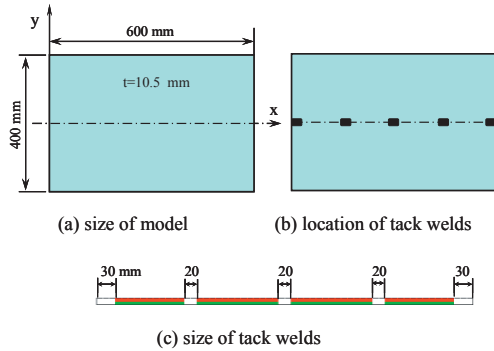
Two pass welding model and tack weld arrangement.
